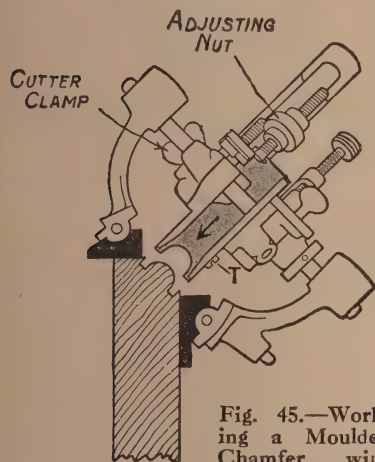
Working a Moulded Chamfer with the Stanley Plane
